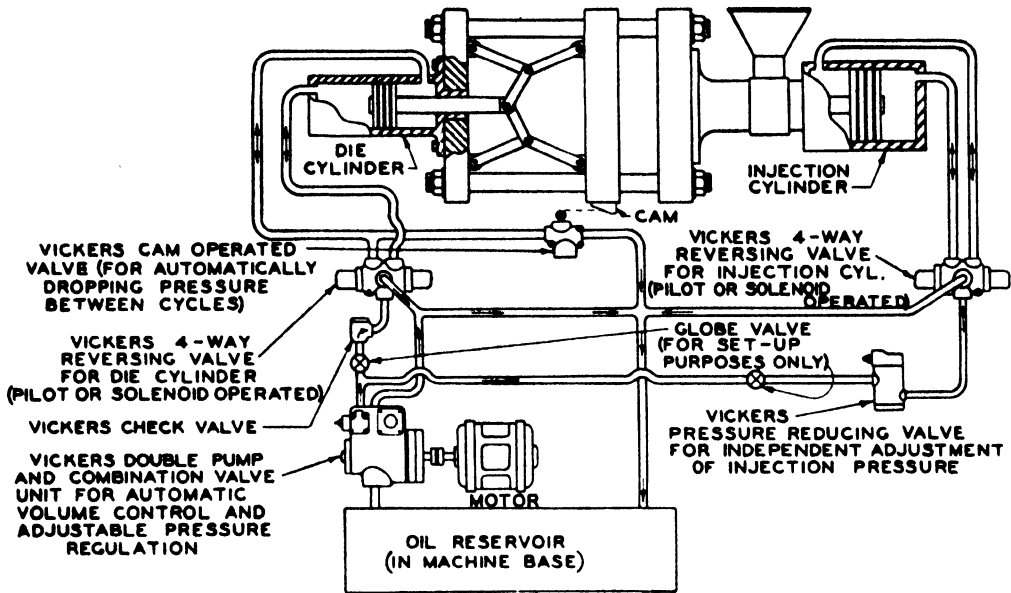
Hydraulic operating circuit of 10 D8 Reed Prentice plastic-injection machine. (Vickers Inc., Detroit, Mich.)
